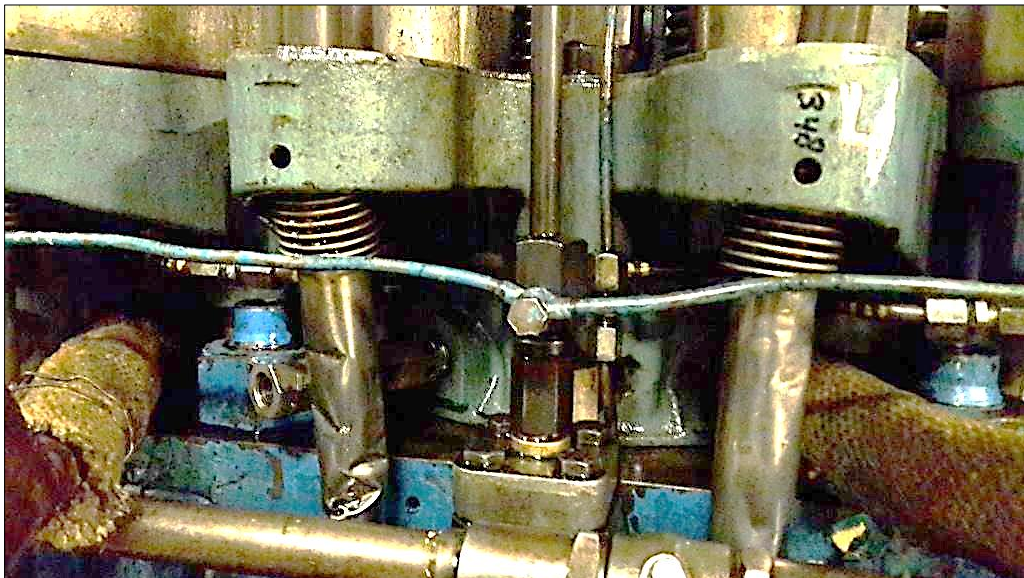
Damaged pushrod protecting pipes of cylinder No. 4 (Photo provided by the operator of seagoing ship)
